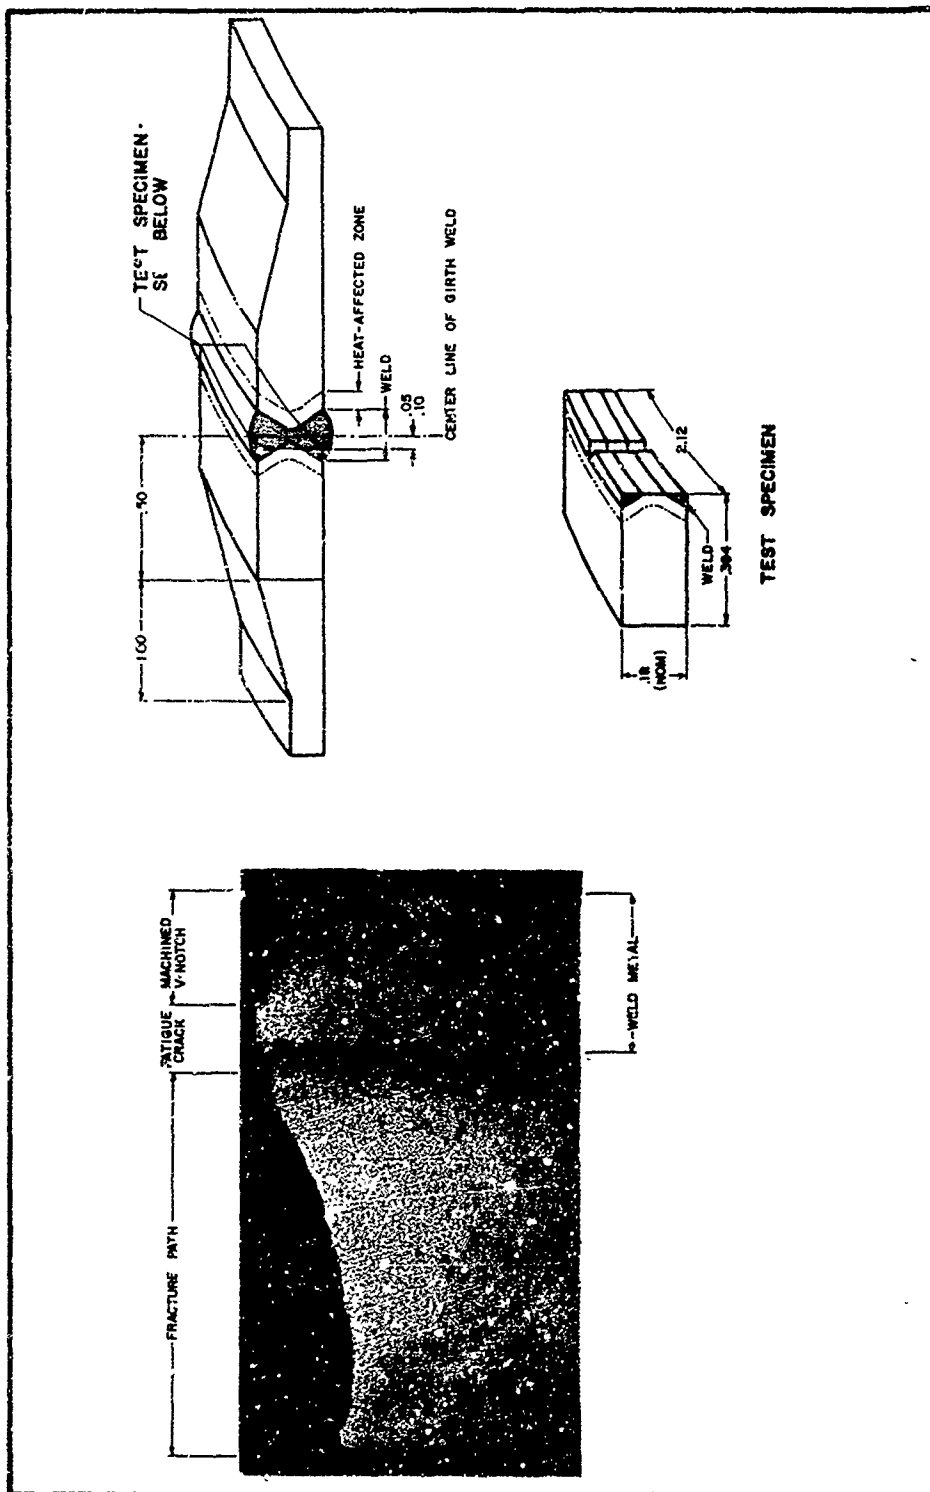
Location of Precrack Charpy Impact Specimens in Reinforced Section at Chamber Girth Welds
